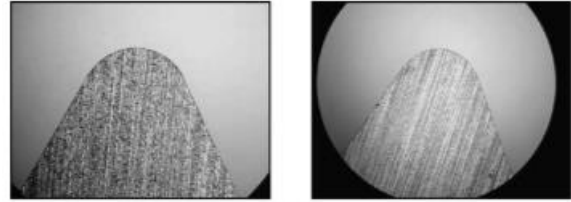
PCBN tool and CBN tool, respectively [27]
